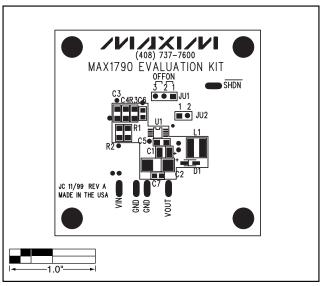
MAX1790 EV Kit Component Placement Guide—Component Side
